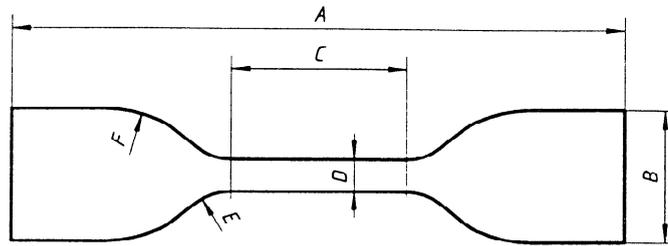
Micro tensile die and punched micro tensile (type A) specimen for tensile testing
